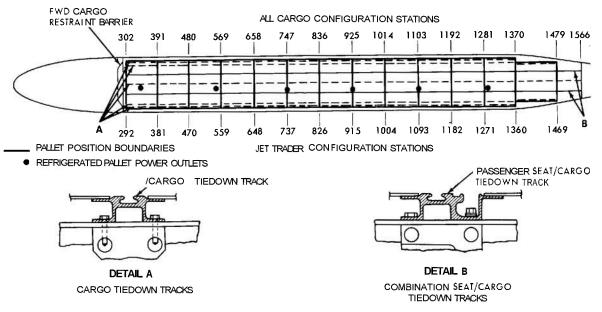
ANCHORING ARRANGEMENT, DC-8F AIRCRAFT
